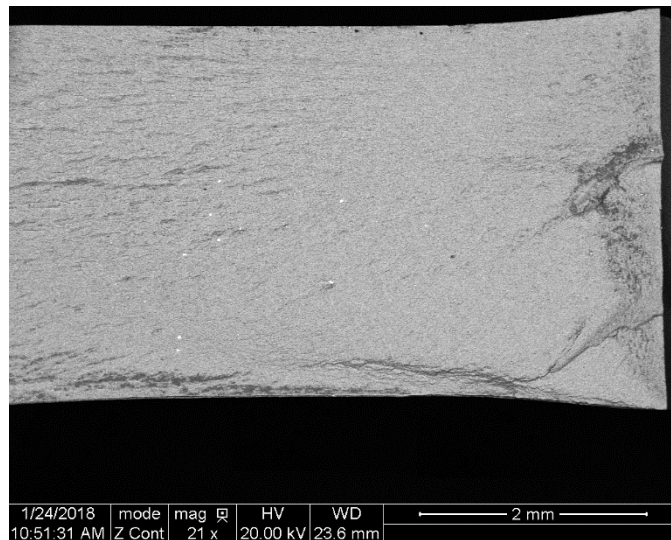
Fracture surface of 3% DCE specimen tested at 170 MPa
